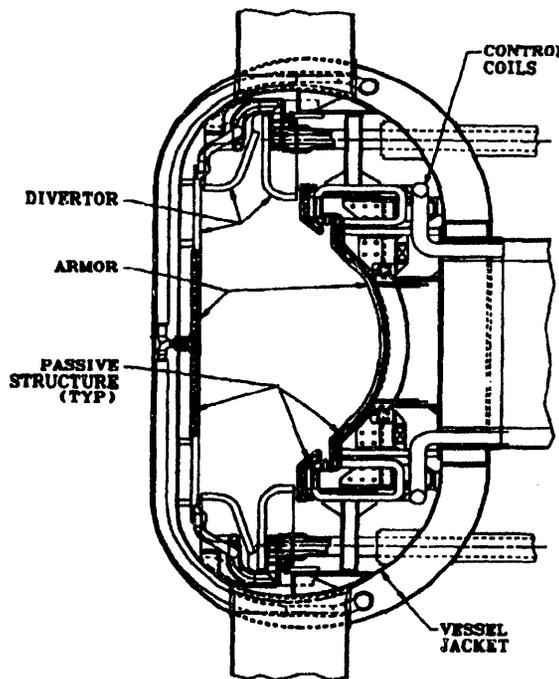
TPX VACUUM VESSEL AND IN-VESSEL COMPONENT DETAILS
